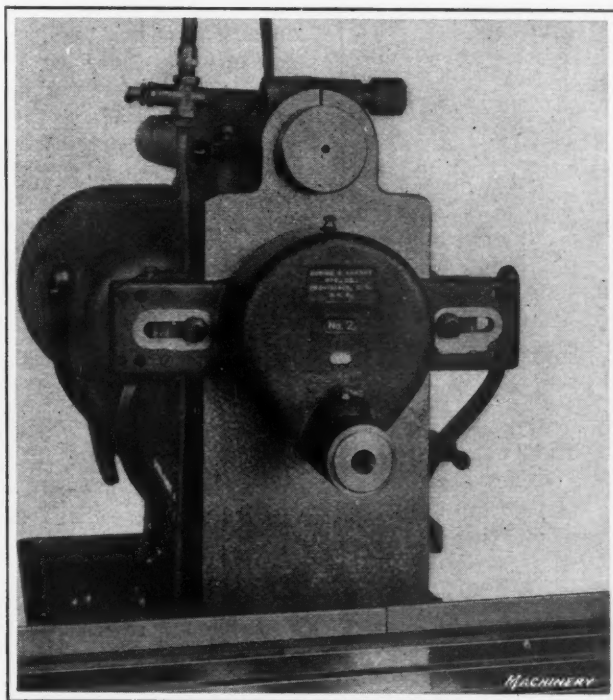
High-speed Milling Attachment designed for Use on Machines built by the Brown & Sharpe Mfg. Co.
